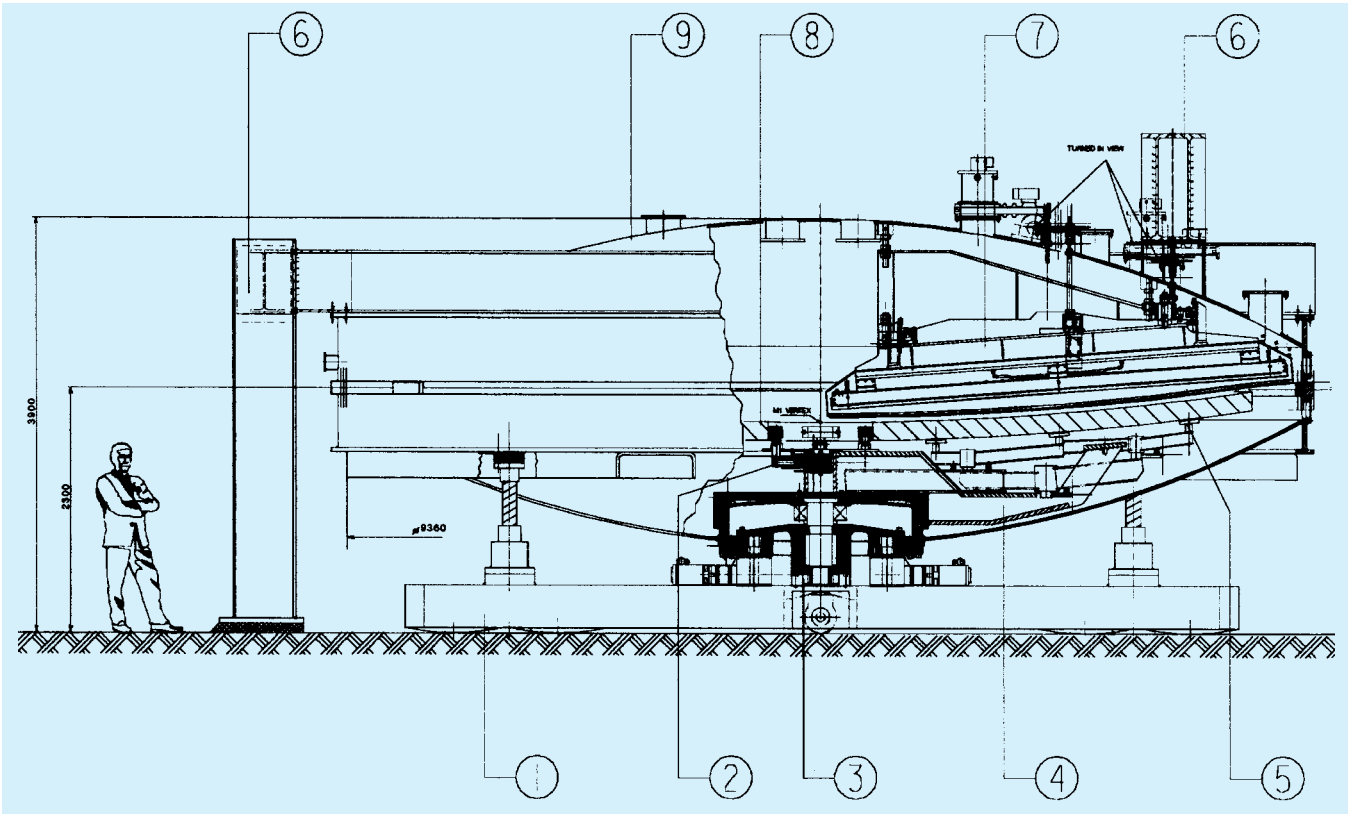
Main components of the VLT Coating Unit. Cart chassis and drive (1), Lateral pads (2), Mirror rotary device (3), Mirror support system (4), Axial pads (5), Supporting frame (6), Magnetron, shield and shutter (7), M1 mirror (8), Vacuum vessel (9).
